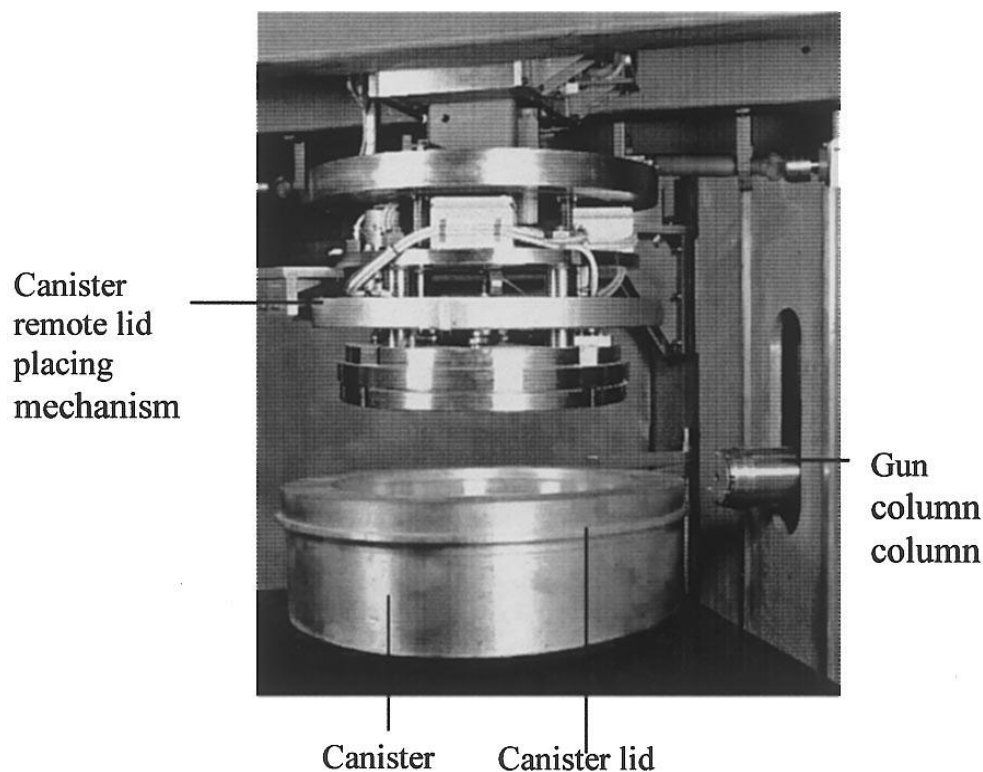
Reduce Pressure Electron Beam Welding Machine [68].
